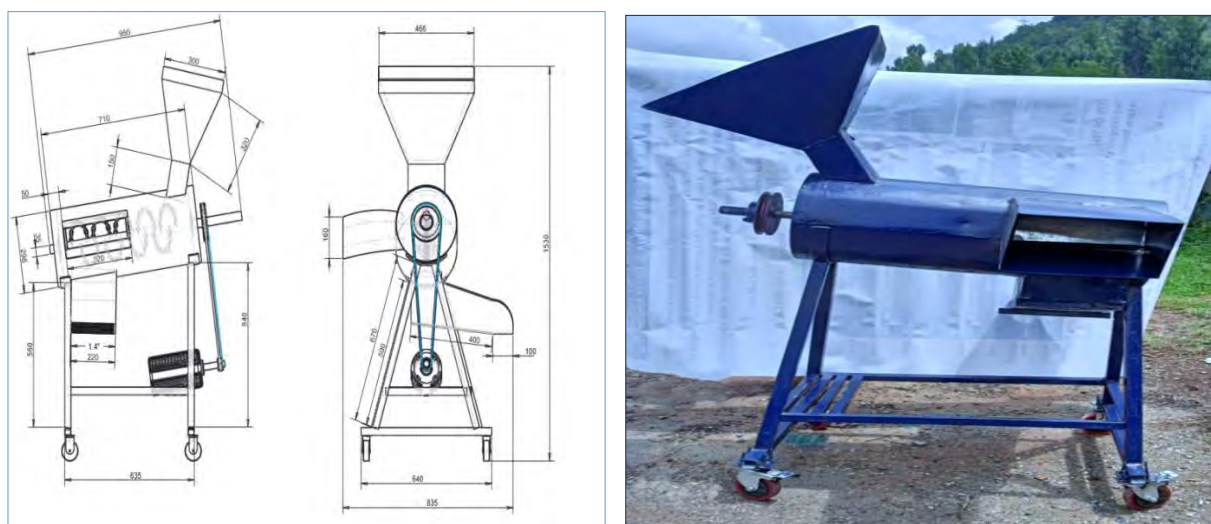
Conceptual design using Pro-E software and fabricated prototype of maize sheller
